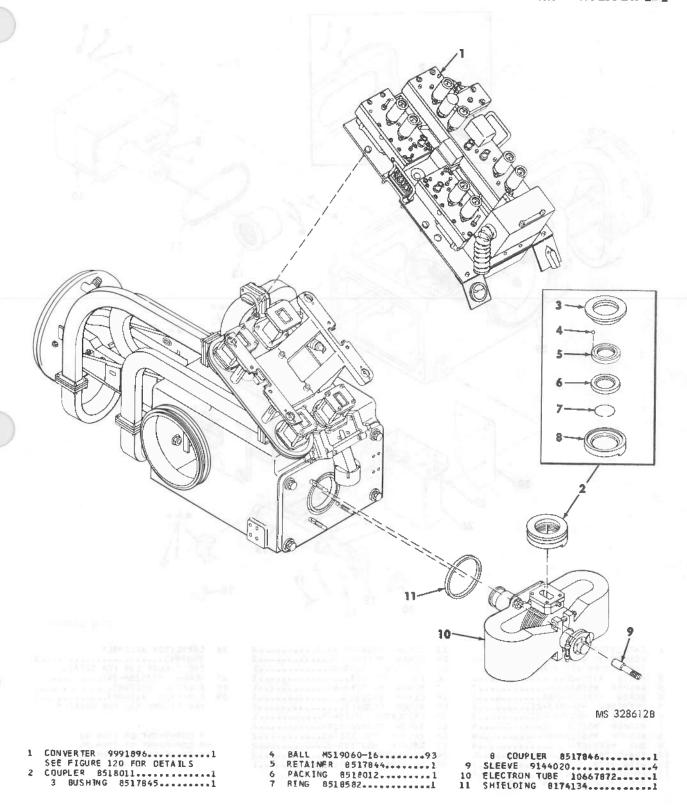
RECEIVER-TRANSMITTER-RADAR SUBASSEMBLY /8172416/-PARTIAL EXPLODED VIEW /SEE FIGURE 74 FOR NEXT HIGHER ASSEMBLY/
